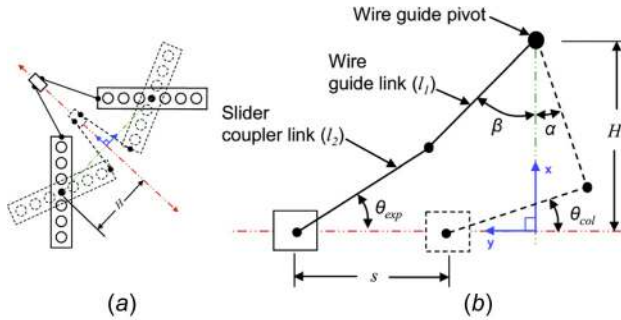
Mechanism geometry detail: (a) positions of wire guides and (b) kinematic relationships [39].
